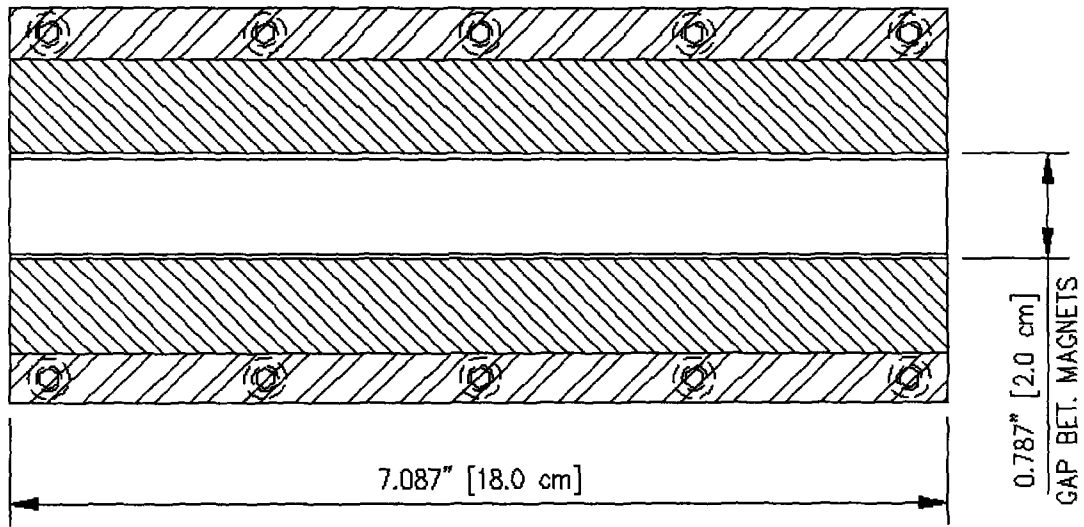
Technical schematic of the four permanent magnets and their stainless steel housing box, side view.
